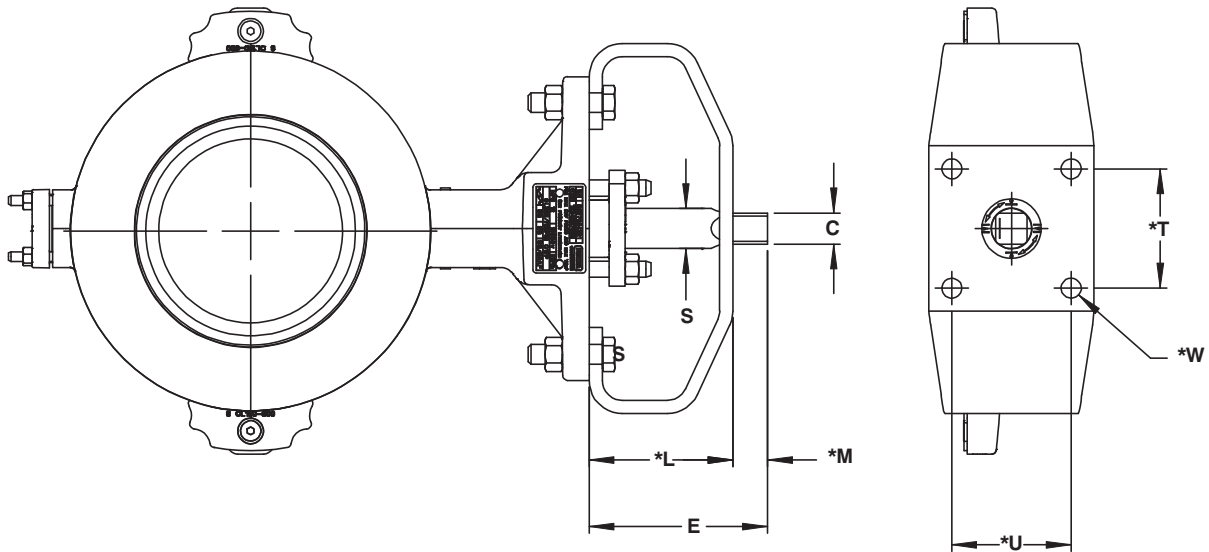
Dimensions for Fisher® A81, Wafer Style Valve
